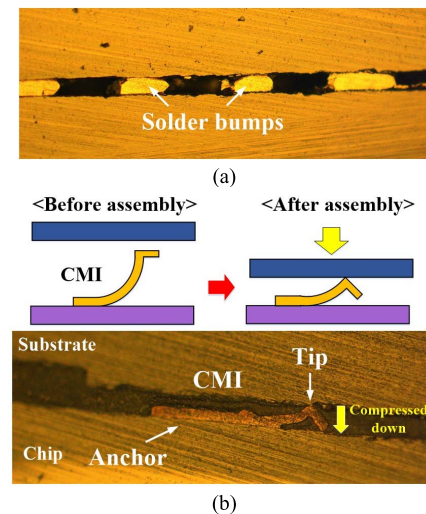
Optical microscope cross-sectional image of (a) solder bumps and (b) CMI.
